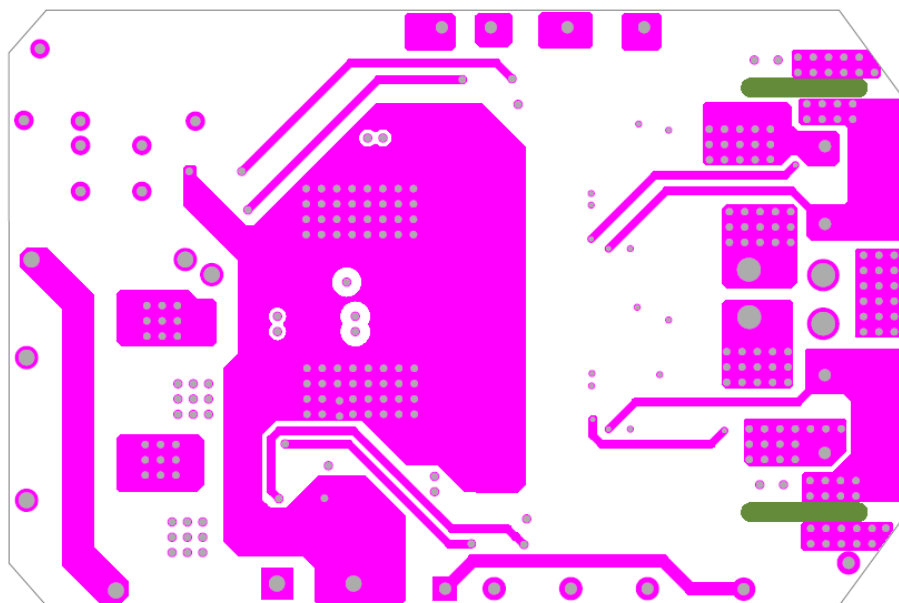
DER-1024 Mother Board Rev B Printed Circuit Layout (Inner Layer 2).
